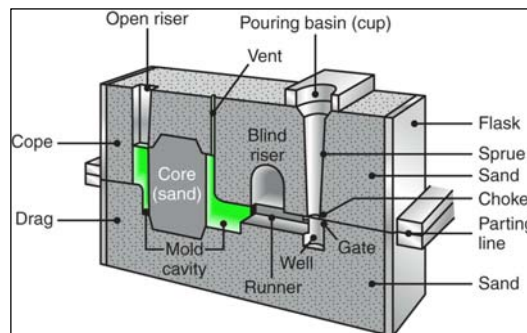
Schematic illustration of a sand mold, showing various features.
